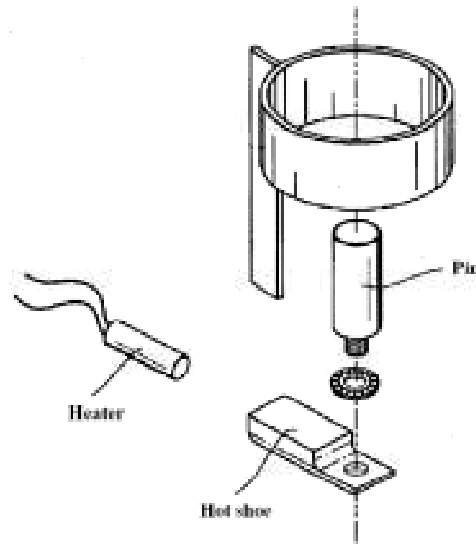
Friction stir welding tool with a heated shoe [8]
